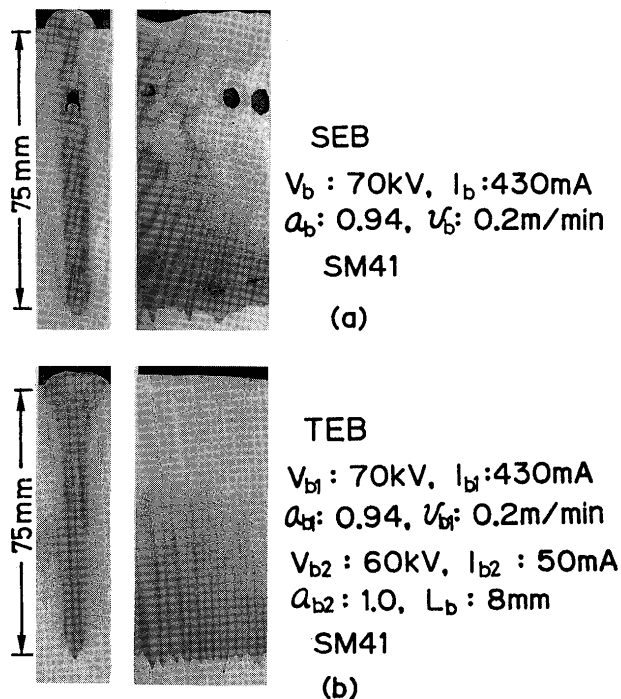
Longitudinal and cross sections of bead in SEB and TEB welding
